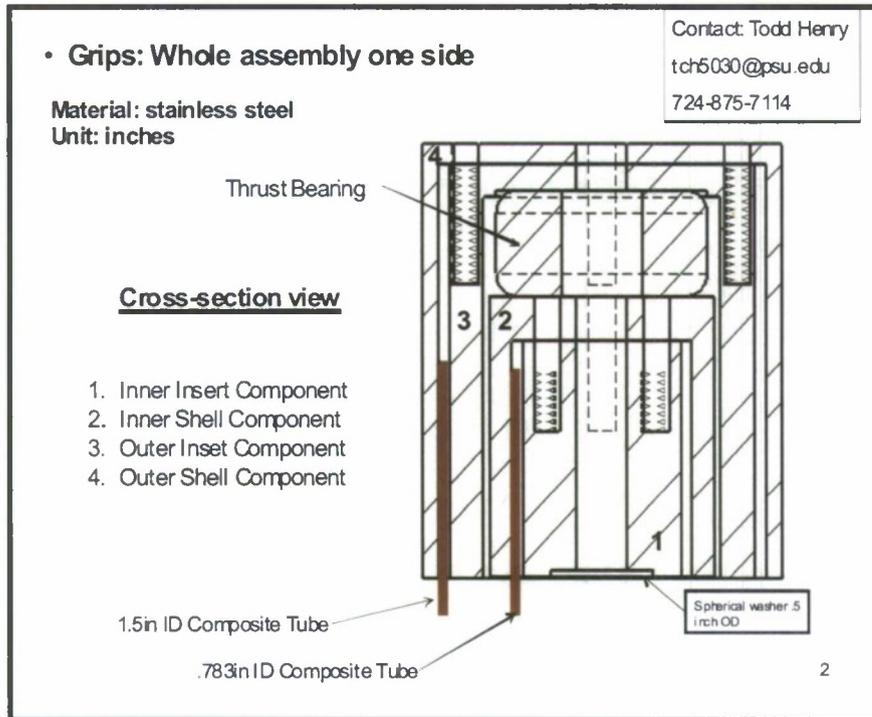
Longitudinal cross-section of one grip for tension-twist coupled concentric tubes.
